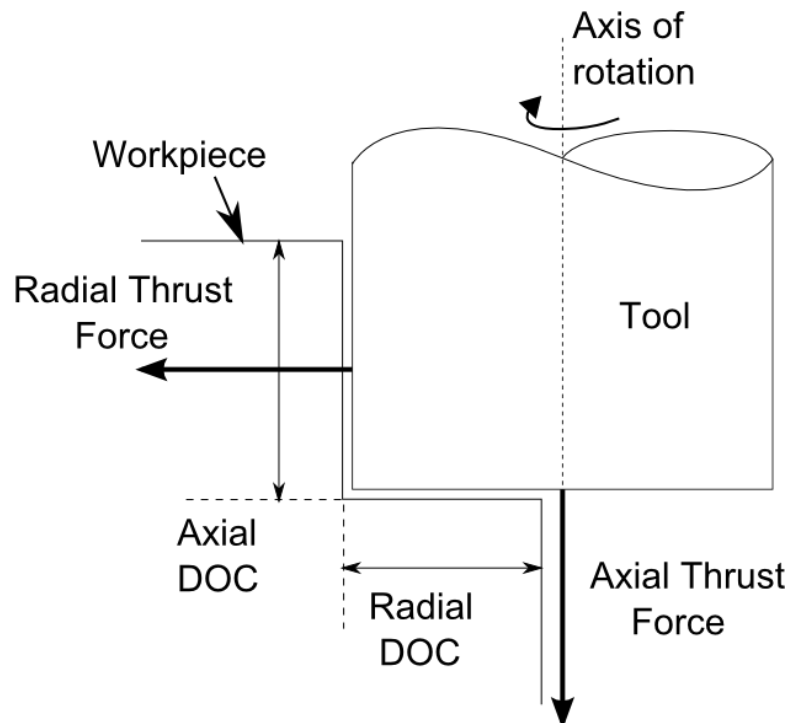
Cutter showing both axial and radial engagement with a workpiece
